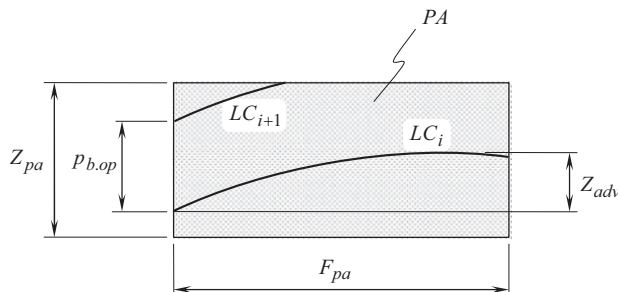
Face advance,  $Z_{adv,lc}$ , in circular-arc parallel-axes involute gearing.
